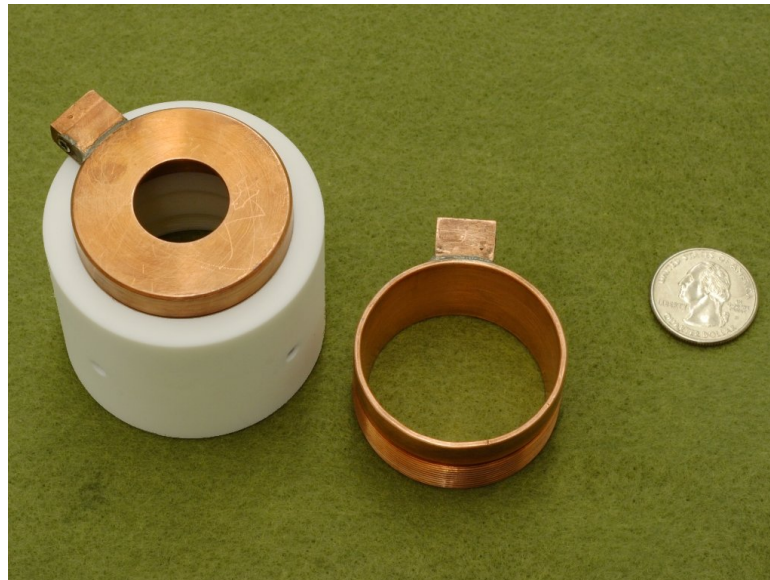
The trigger ring is threaded into the front of the macor ring.
